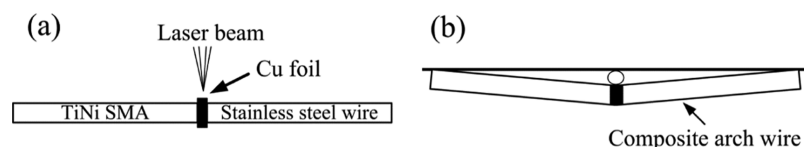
Schematic diagram of (a) the CAW assembly by laser welding and (b) the device used to apply three-point bending forces to the CAW samples.
